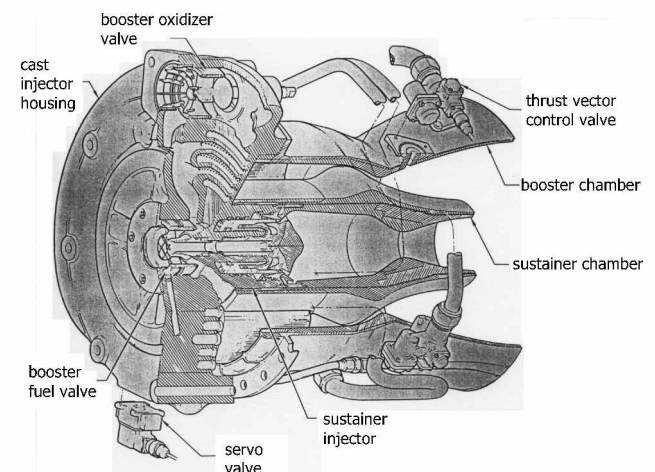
TC assembly of Lance surface-to-surface missile, 19.4 in. high and 173 lb weight (courtesy, Rocketdyne).
